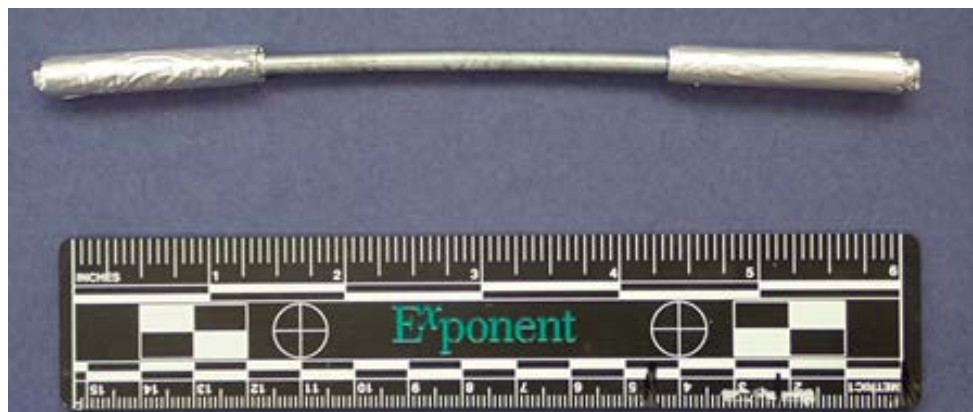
Representative photograph of a tensile specimen with aluminum foil wrapped ends. The aluminum foil reduces the likelihood of failure outside the gauge length.
